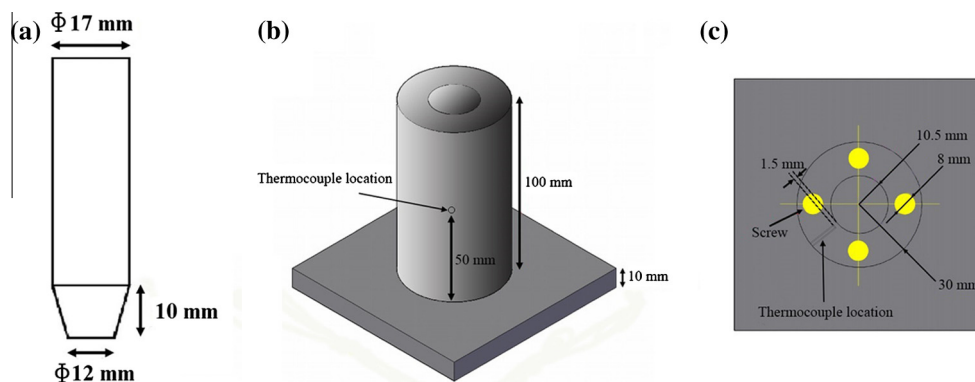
The schematic illustrations of (a) the FSBE tool, (b) and (c) the general and bottom view of the die, respectively.
